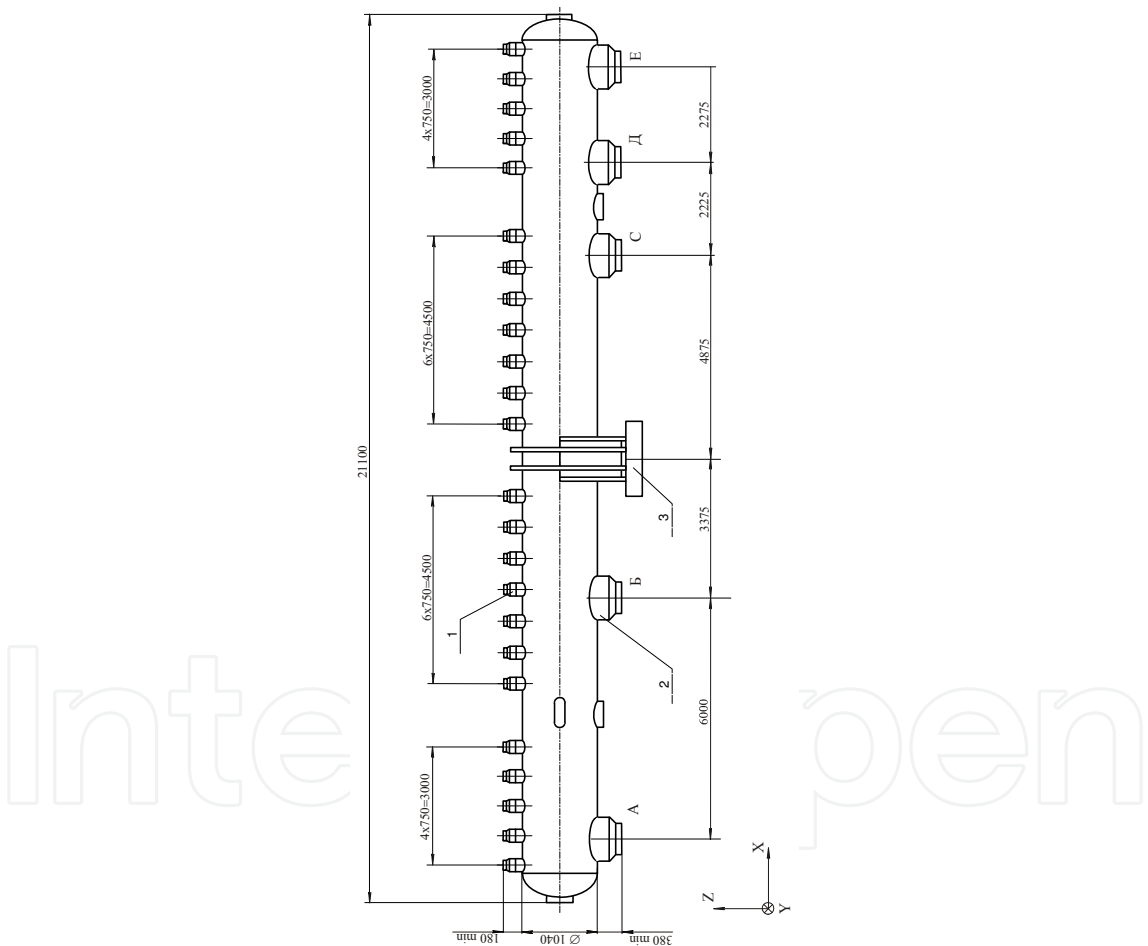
Sketch of header in-take: 1 – nozzle DN300 to joint with down-comer; 2 – nozzle DN750 to joint with pipe-lines in-take; 3 – central stopper
